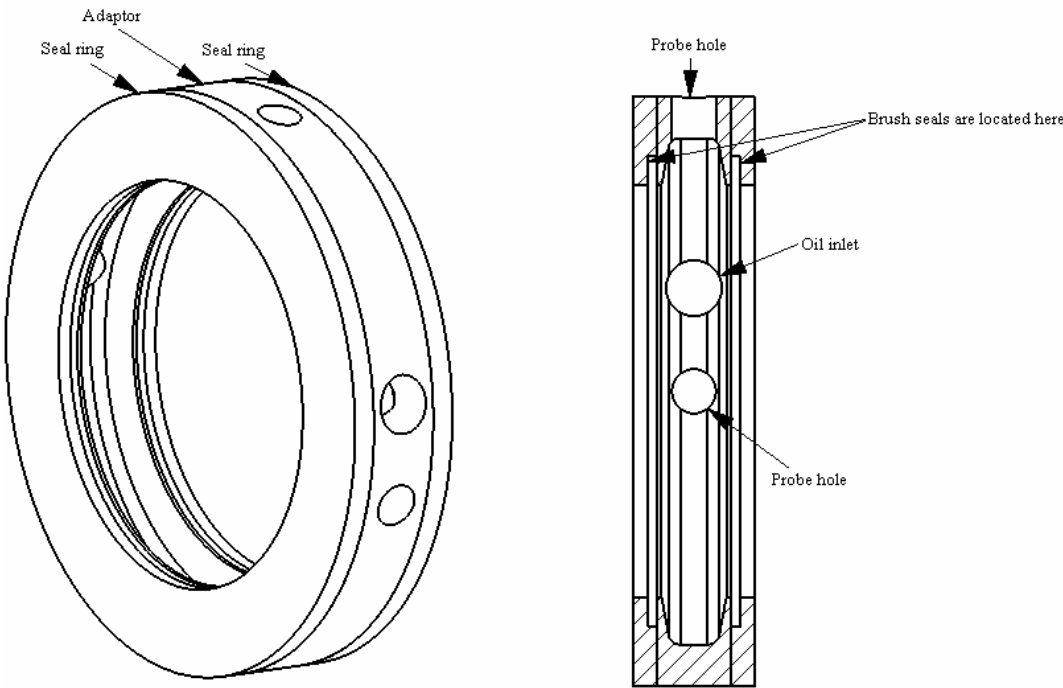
Detailed view of assembly of adaptor and seal rings
